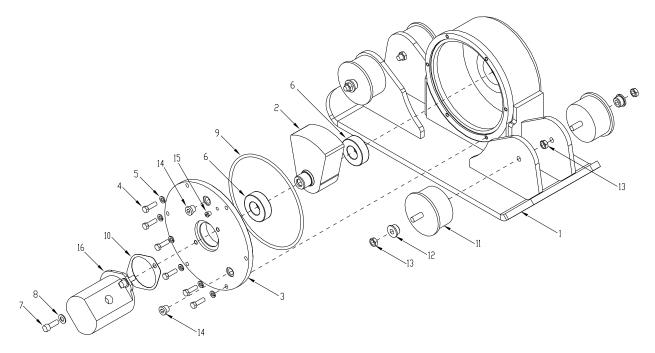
Model 300 - Dynamic Assembly & Suspension
